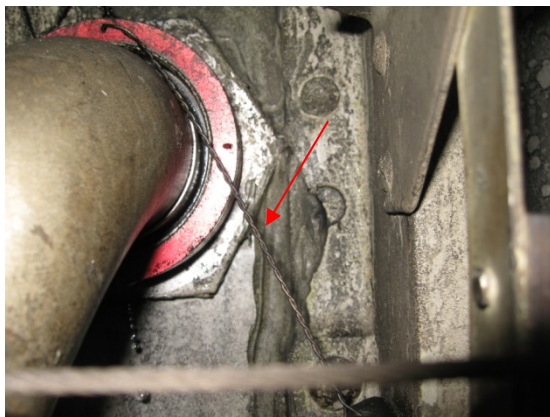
Lock wire in in such a way that the coupling nut could rotate slightly
